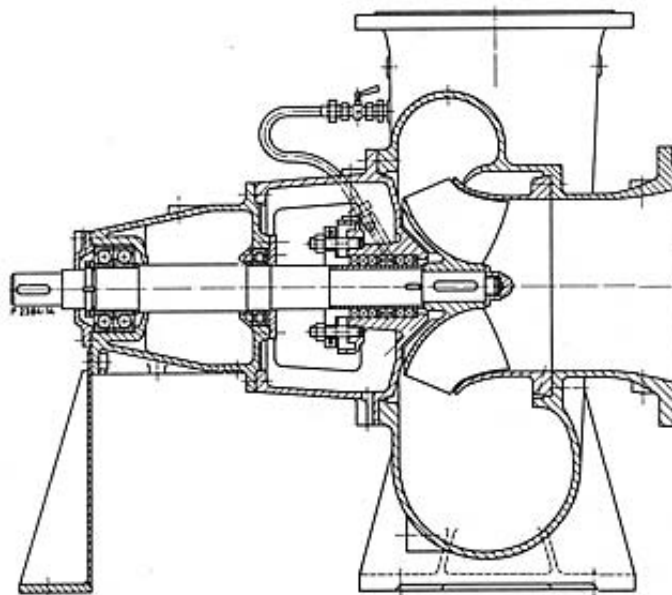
Volute casing pump with open helical impeller and free vortex volute
